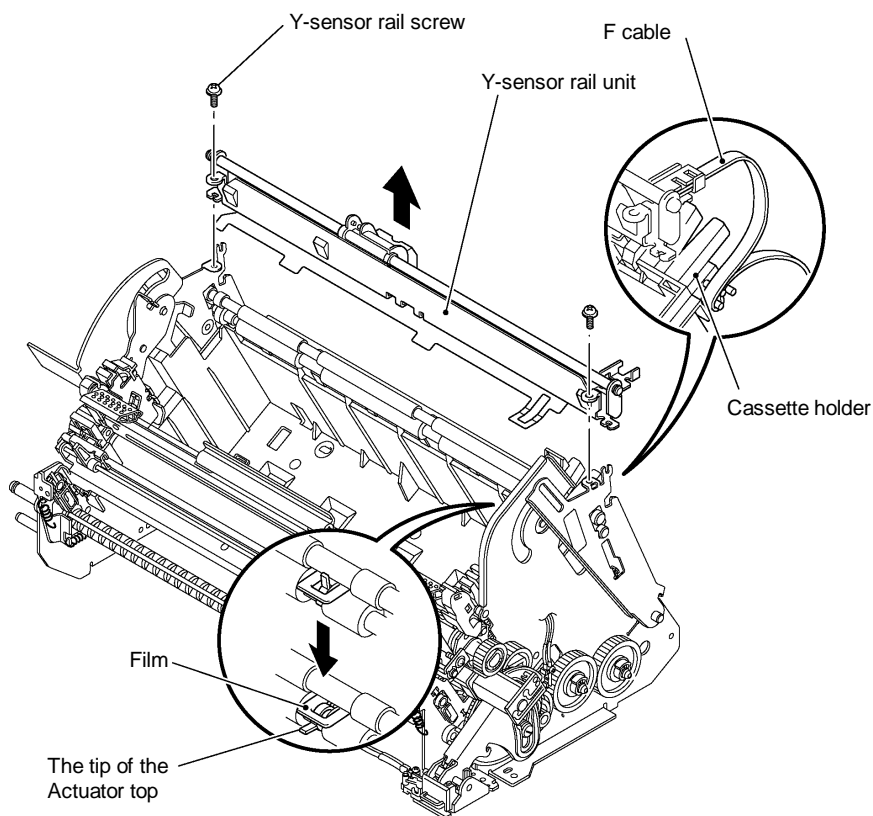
Removing the Y-sensor Rail Unit
